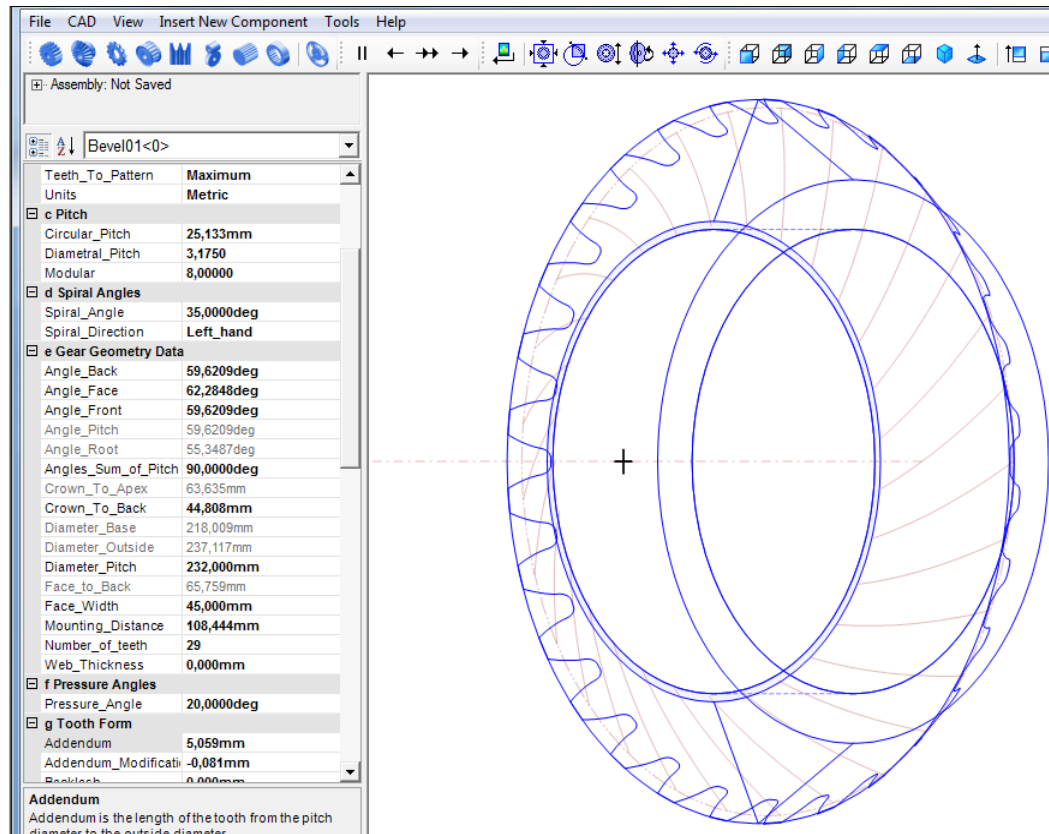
Modelling of the spiral bevel ring gear using GearTeq by entering its measurements
